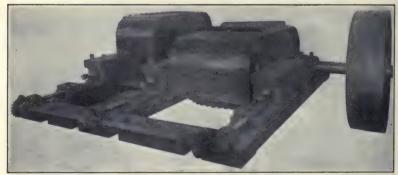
Crushing Rolls with Housing Over Rolls and Gears
